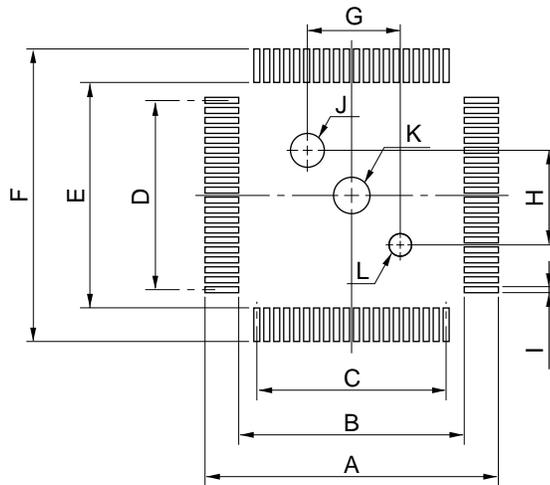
EV-9200GC-80 Package Drawing (for Reference Only)
